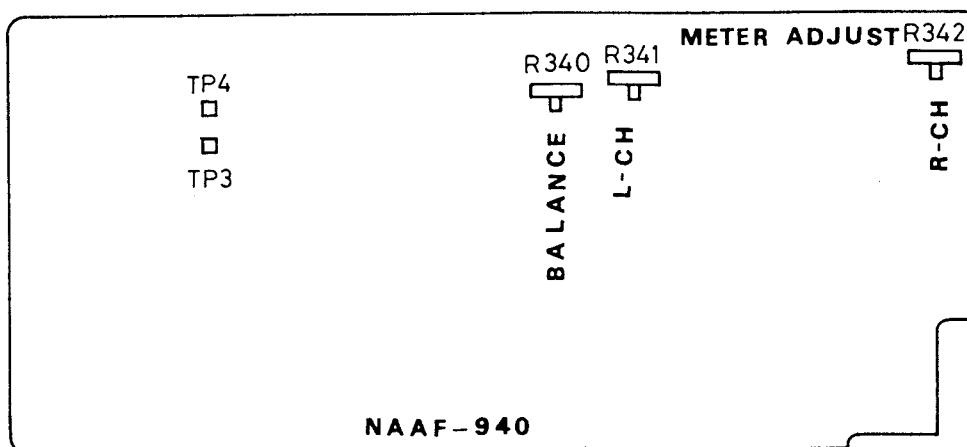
Audio amplifier and meter drive pc board-adjustment points
